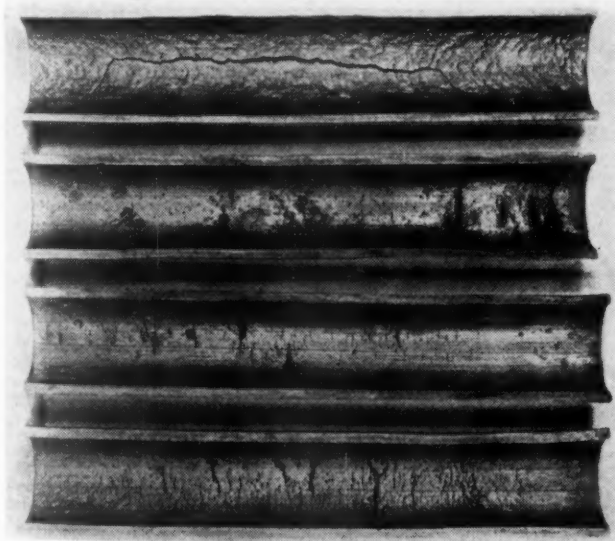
FAILURE OF SUPERHEATER TUBES FROM CORROSION FATIGUE
